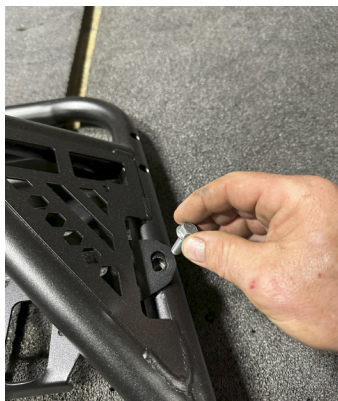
& FIG 12 - Install and fasten Rear Panel to Headache Rack Frame
